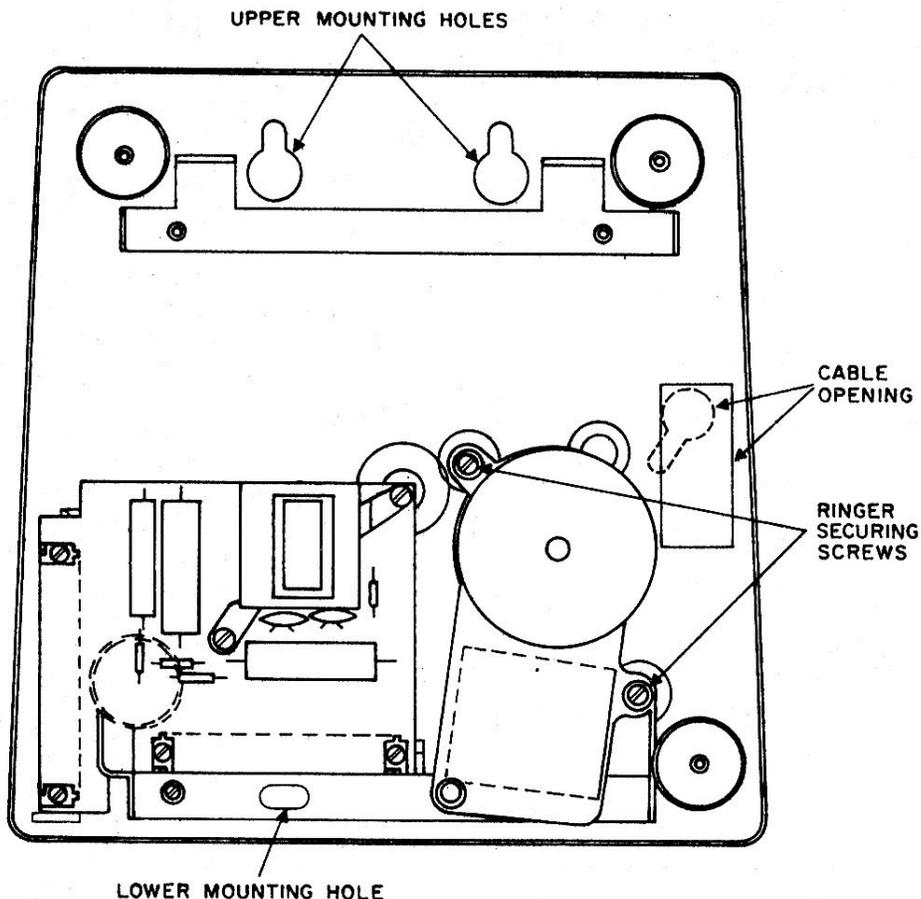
Wall Mounting Hole Location and Ringer Mounting Details.
